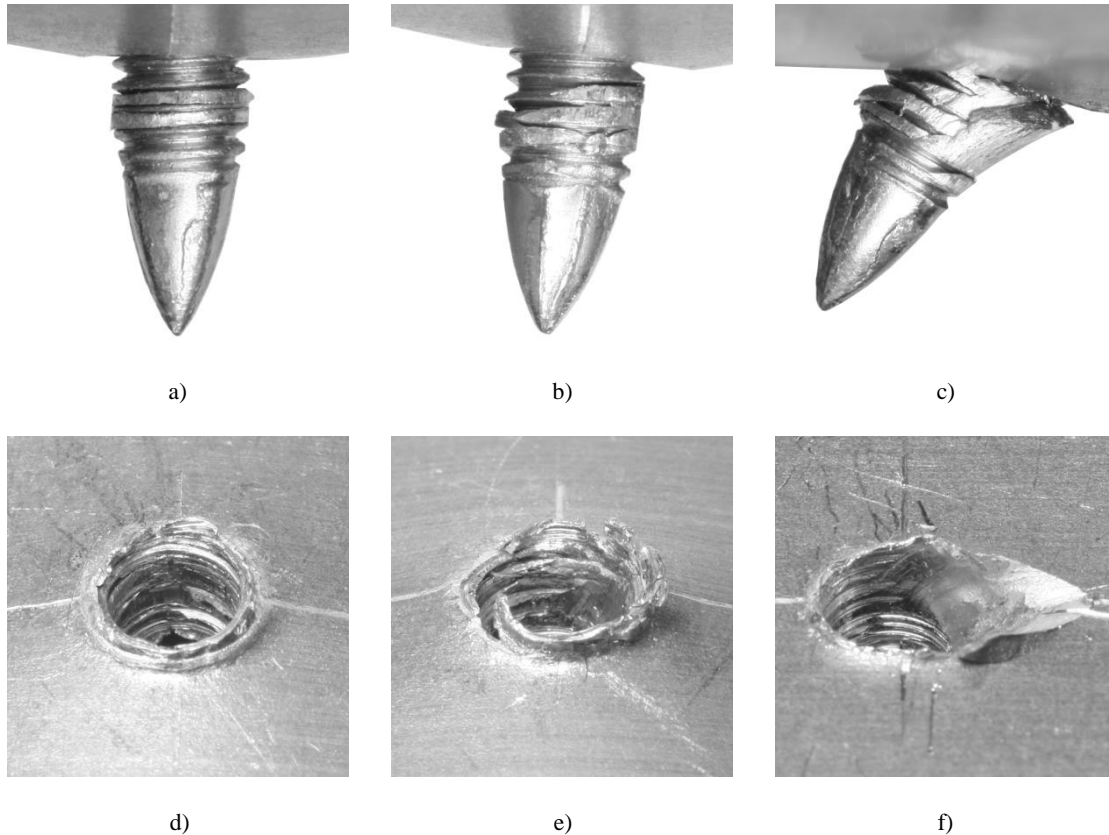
Details of separated cross specimens. a), b) and c): residue material on screws after separation for tensile, mixed and shear loading cases, respectively. d), e) and f): screw hole in bottom sheet (viewed from the top side) after separation for tensile, mixed and shear loading cases, respectively.
